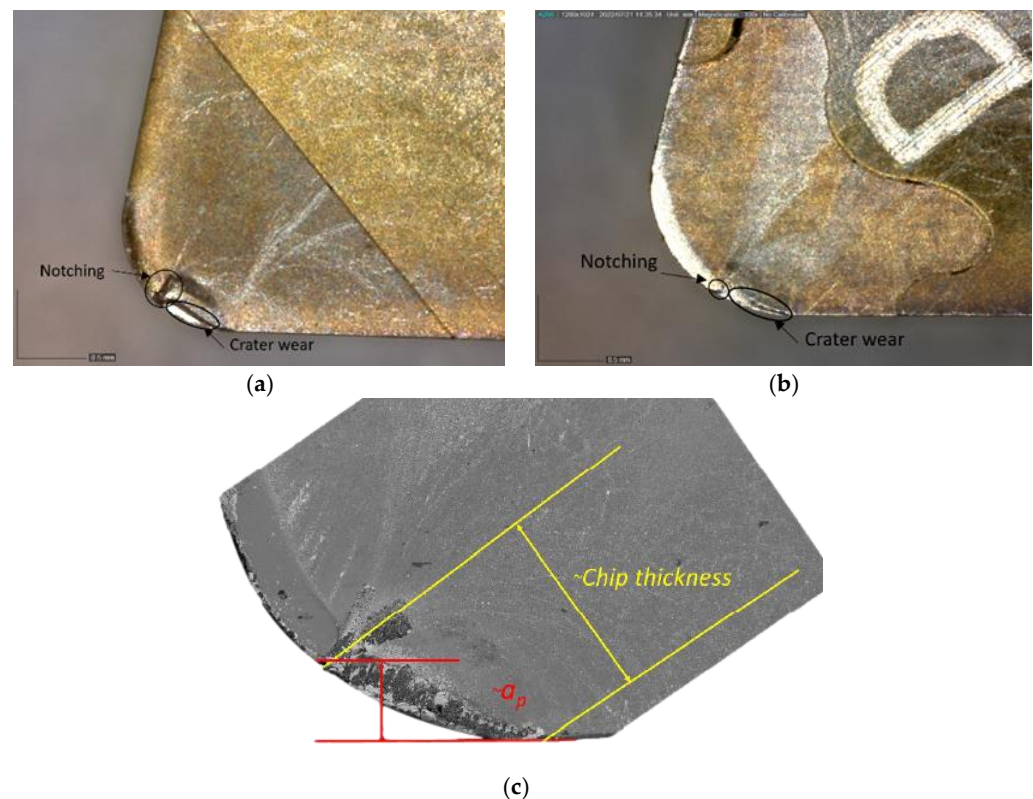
Rake face after 1.5 min of machining time: (a) insert 603; (b) insert 602; (c) notching occurrence located at depth of cut dimension.
